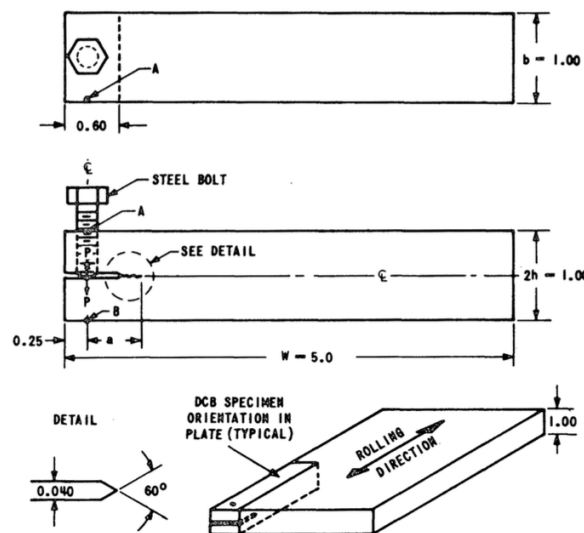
Double cantilever beam (DCB) specimen used for stress corrosion cracking (SCC) testing of high-strength aluminium alloys [44].
